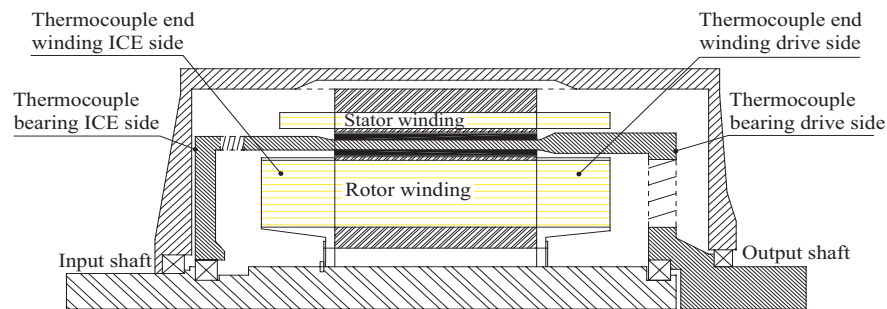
Thermocouple placement for bearing and end winding temperature measurements.
